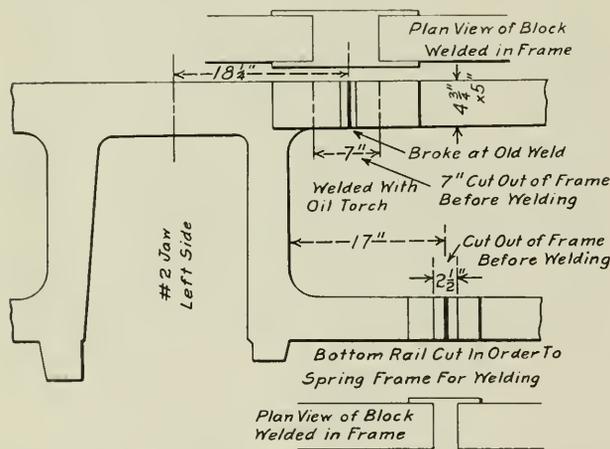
Location of Oil Weld on Frame of Passenger Locomotive
